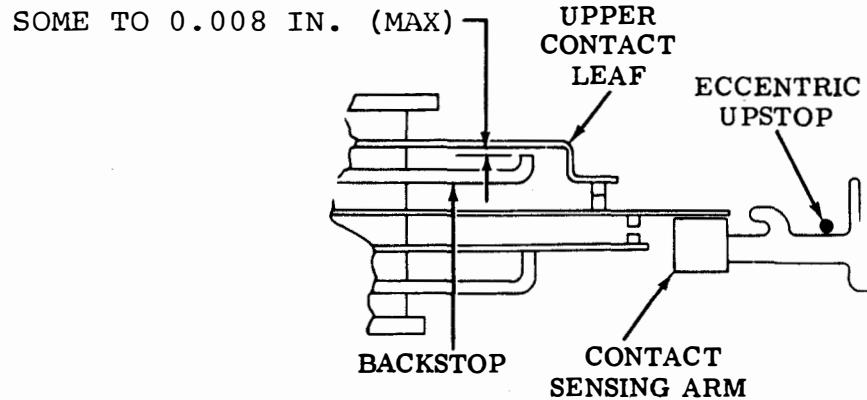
Contact Sensing Arm - Upstop Clearance, Front View
